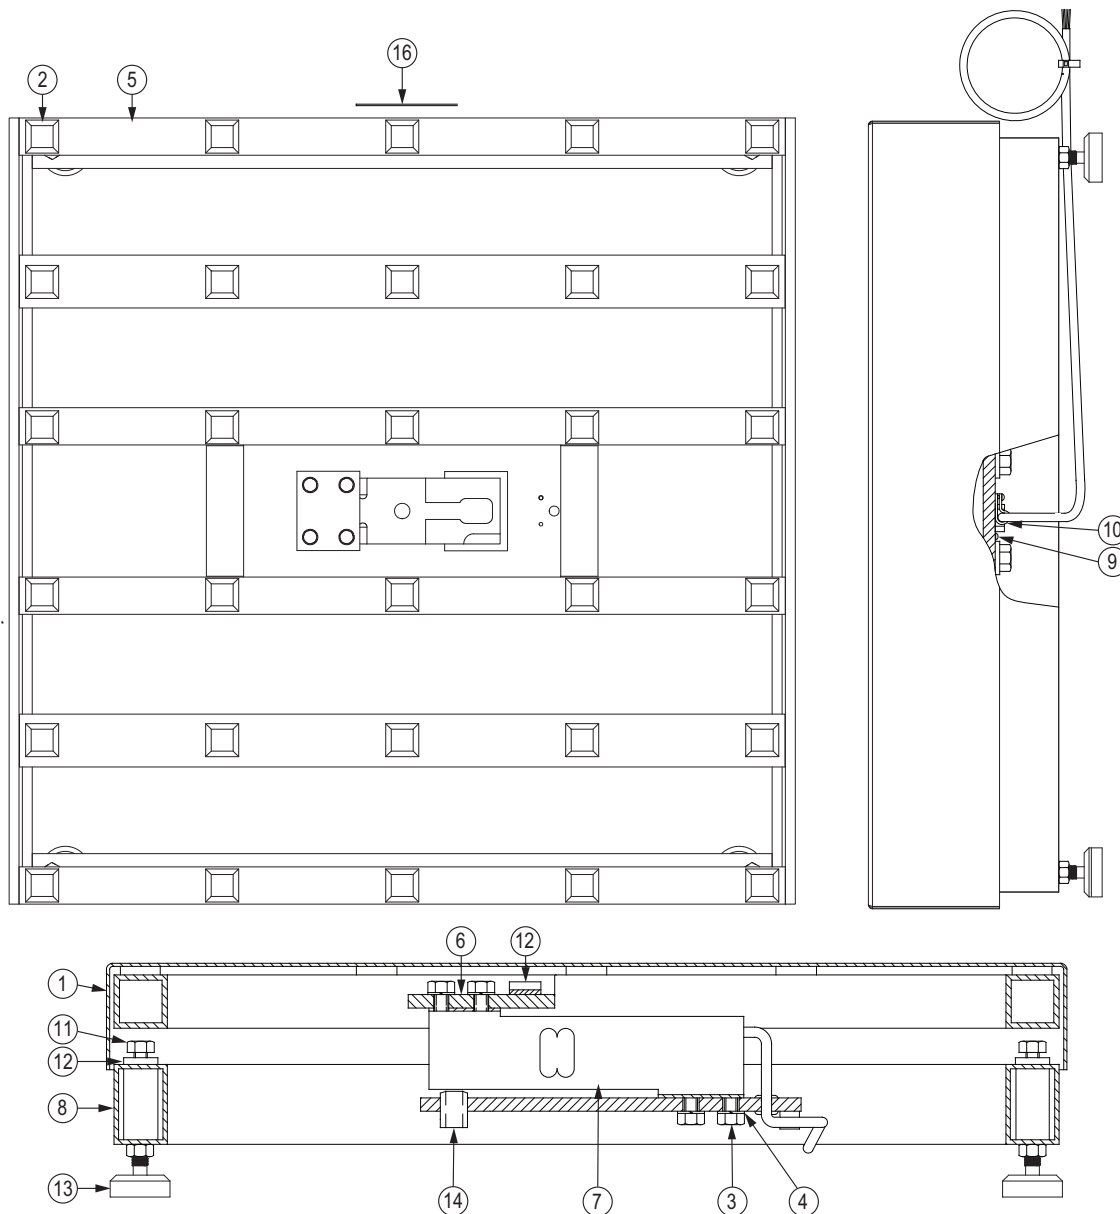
BenchMark HD Assembly Drawing Breakout
